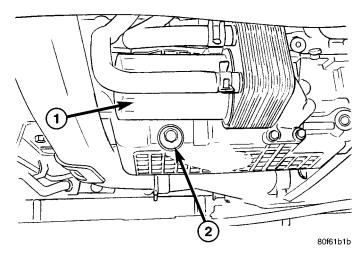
Oil Filter and Drain Plug - 2.4L Turbo
